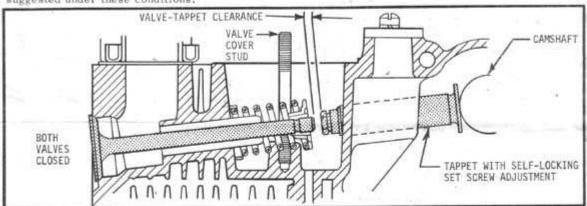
CUTAWAY VIEW SHOWING VALVE - TAPPET CLEARANCE
